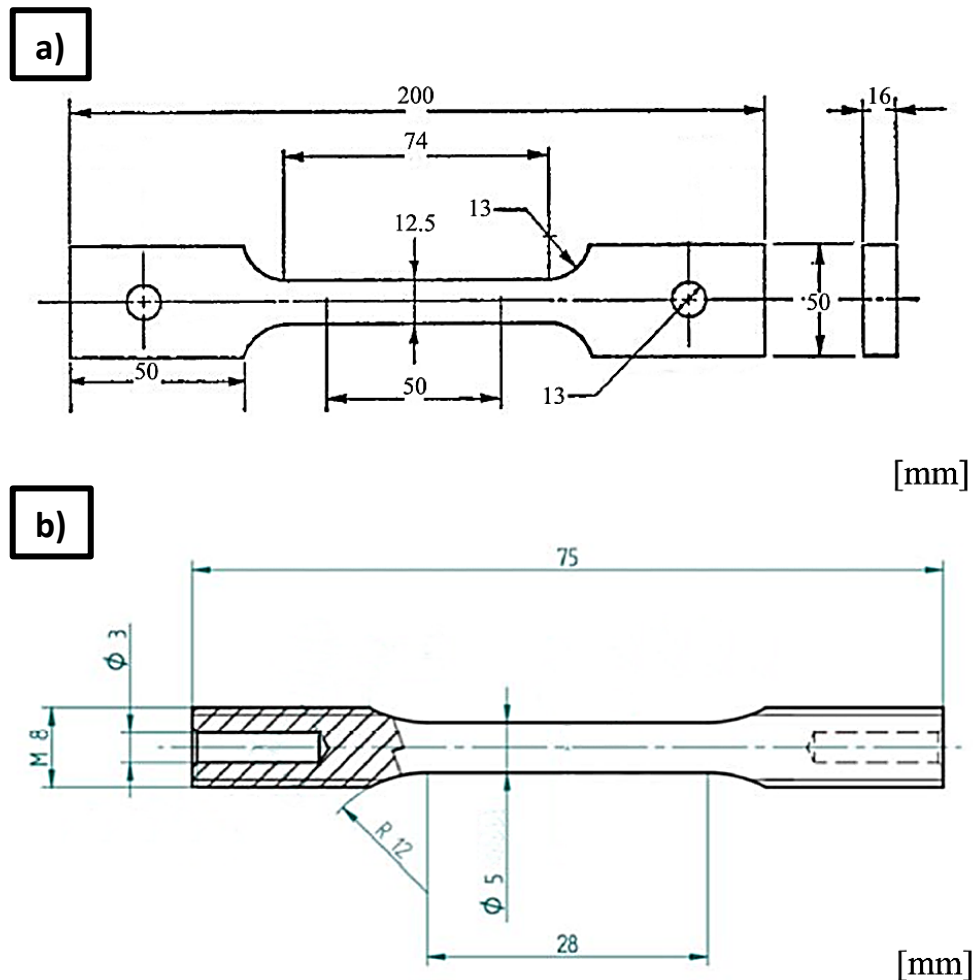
Examples of standard uniaxial tensile samples: (a) ASTM standard pin-loaded tension test specimen (ASTM International. 100 Barr Harbour Dr.); (b) EN ISO standard cylindrical tension test specimen (E. Balducci 2017).
